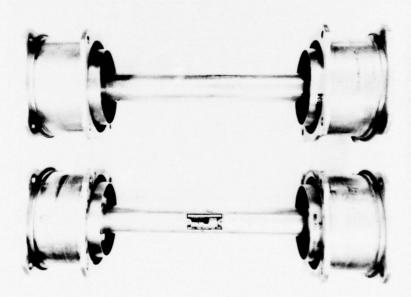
Test Driveshaft Assemblies, 206-040-100.
